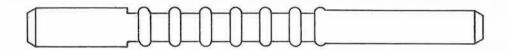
Button Burnisher for Sizing Oilite Bearings
